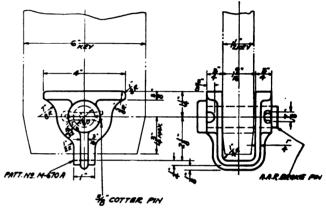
Permissible substitute—Universal draft-key retainer—Universal Draft Gear Attachment Company
